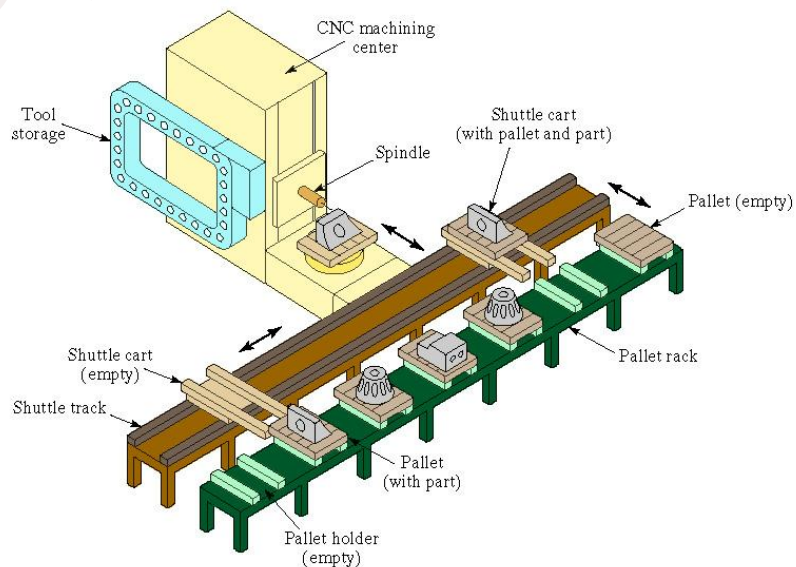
Single machine cell with one CNC machining center and parts storage unit
